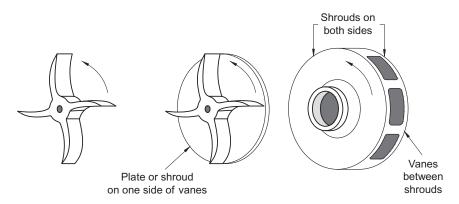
Basic types of centrifugal pump impellers: open, semiopen, and closed.
